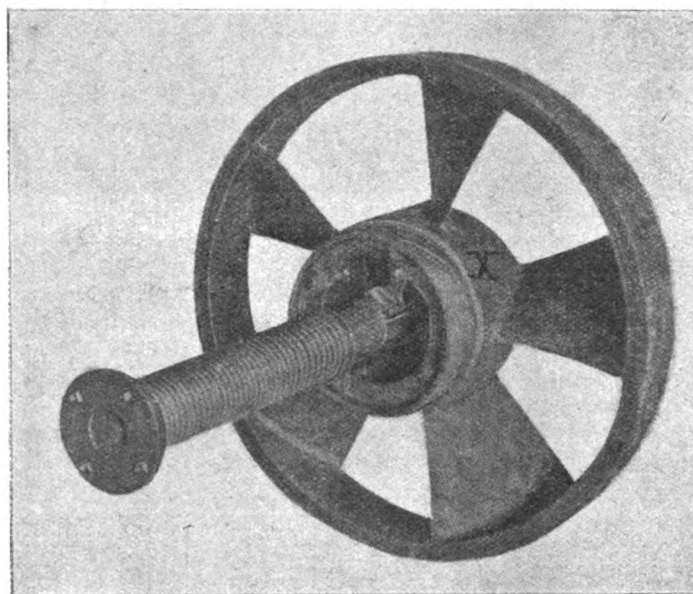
VIEW OF NEW FAN-TYPE FLYWHEEL AND CLUTCH.
